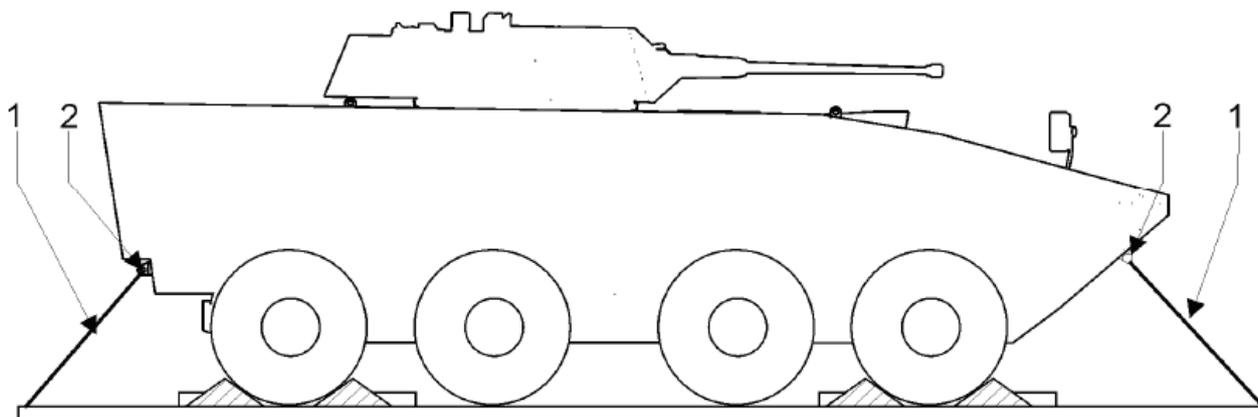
Example of AFV ROSOMAK mounting on the cargo flatbed (source WZM S.A)
